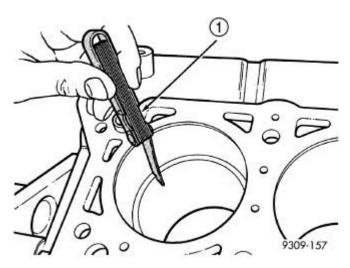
Checking Gap On Piston Rings Courtesy of CHRYSLER LLC
